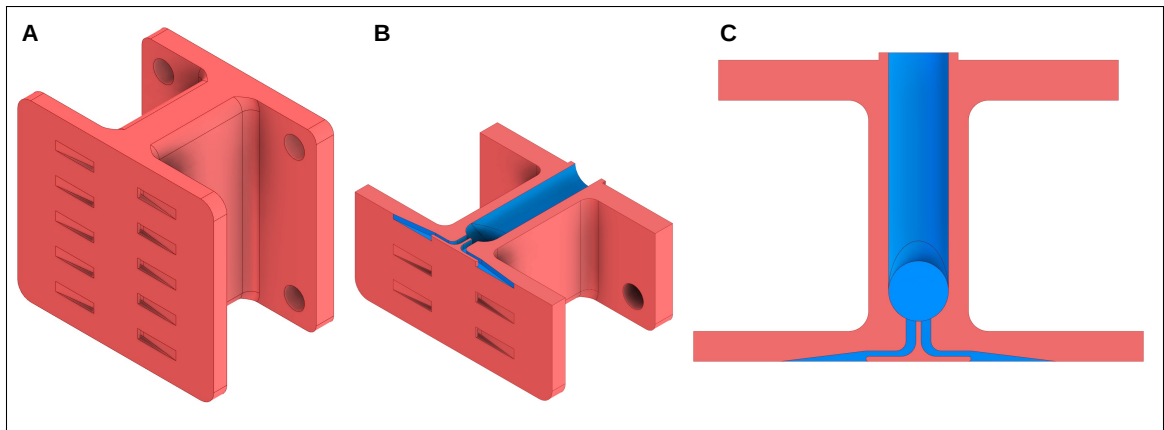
A) Bernoulli trial prototype - B) Cutaway view of the Bernoulli trial, where the pressurized cavity is highlighted in blue. - C) Cross-section view
